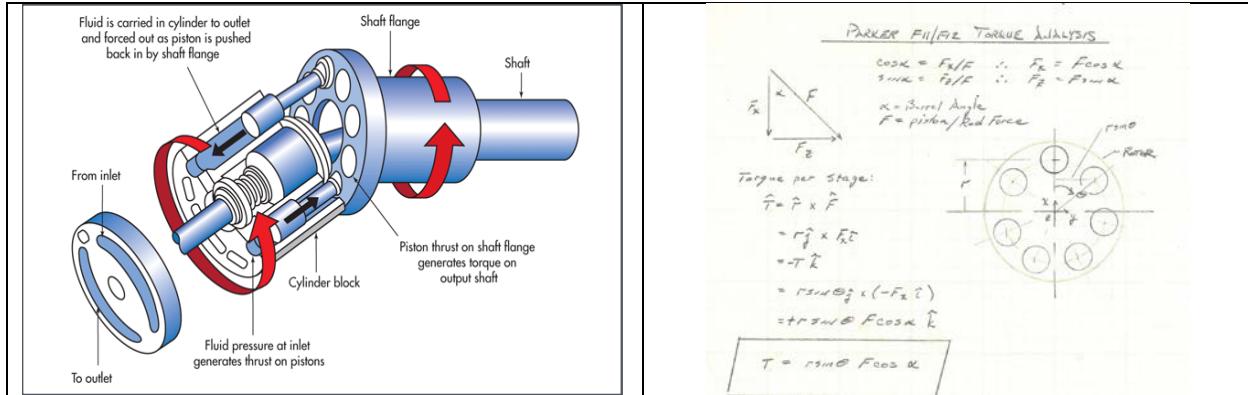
a) Conventional Hydraulic Piston Motor (per Hydraulics & Pneumatics.com) and b) Method of Torque Generation.
